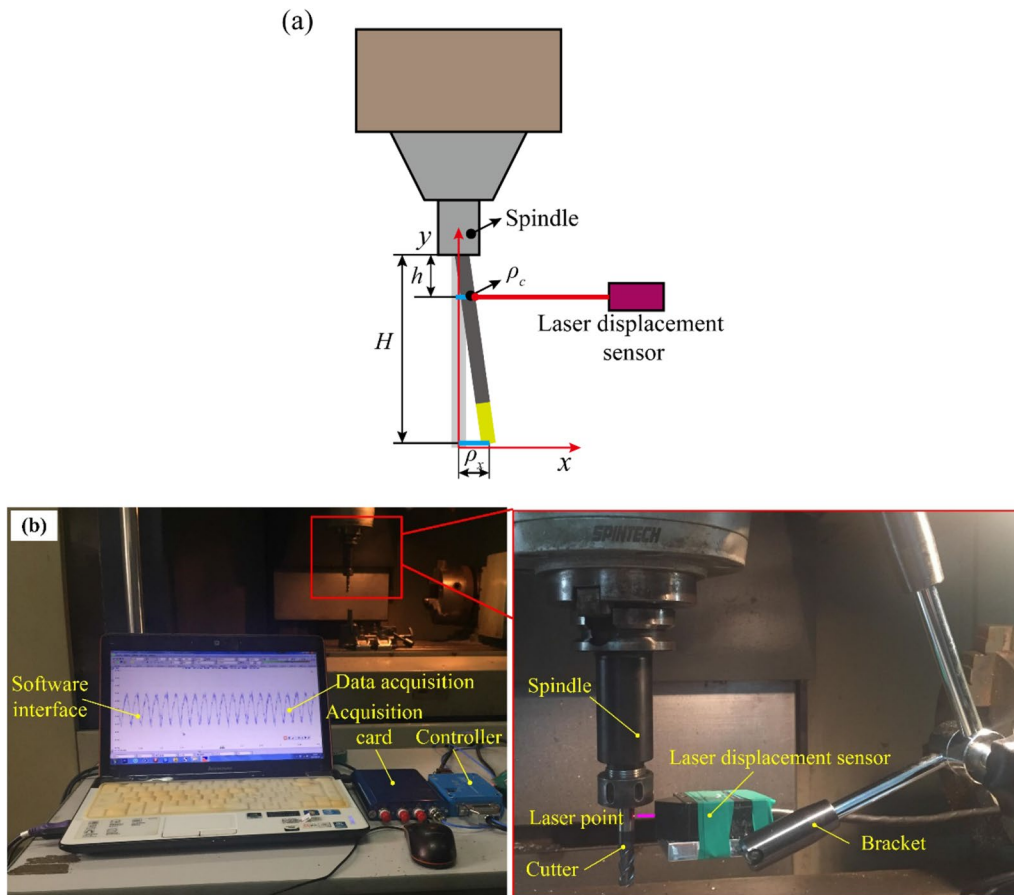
Tool runout measurement experiment: a Principle of tool runout measurement, b Tool runout measurement
